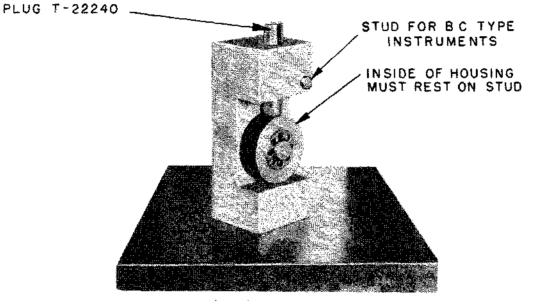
INSTALLING THE AIR FIVOT IN THE ROTOR HOUSING
